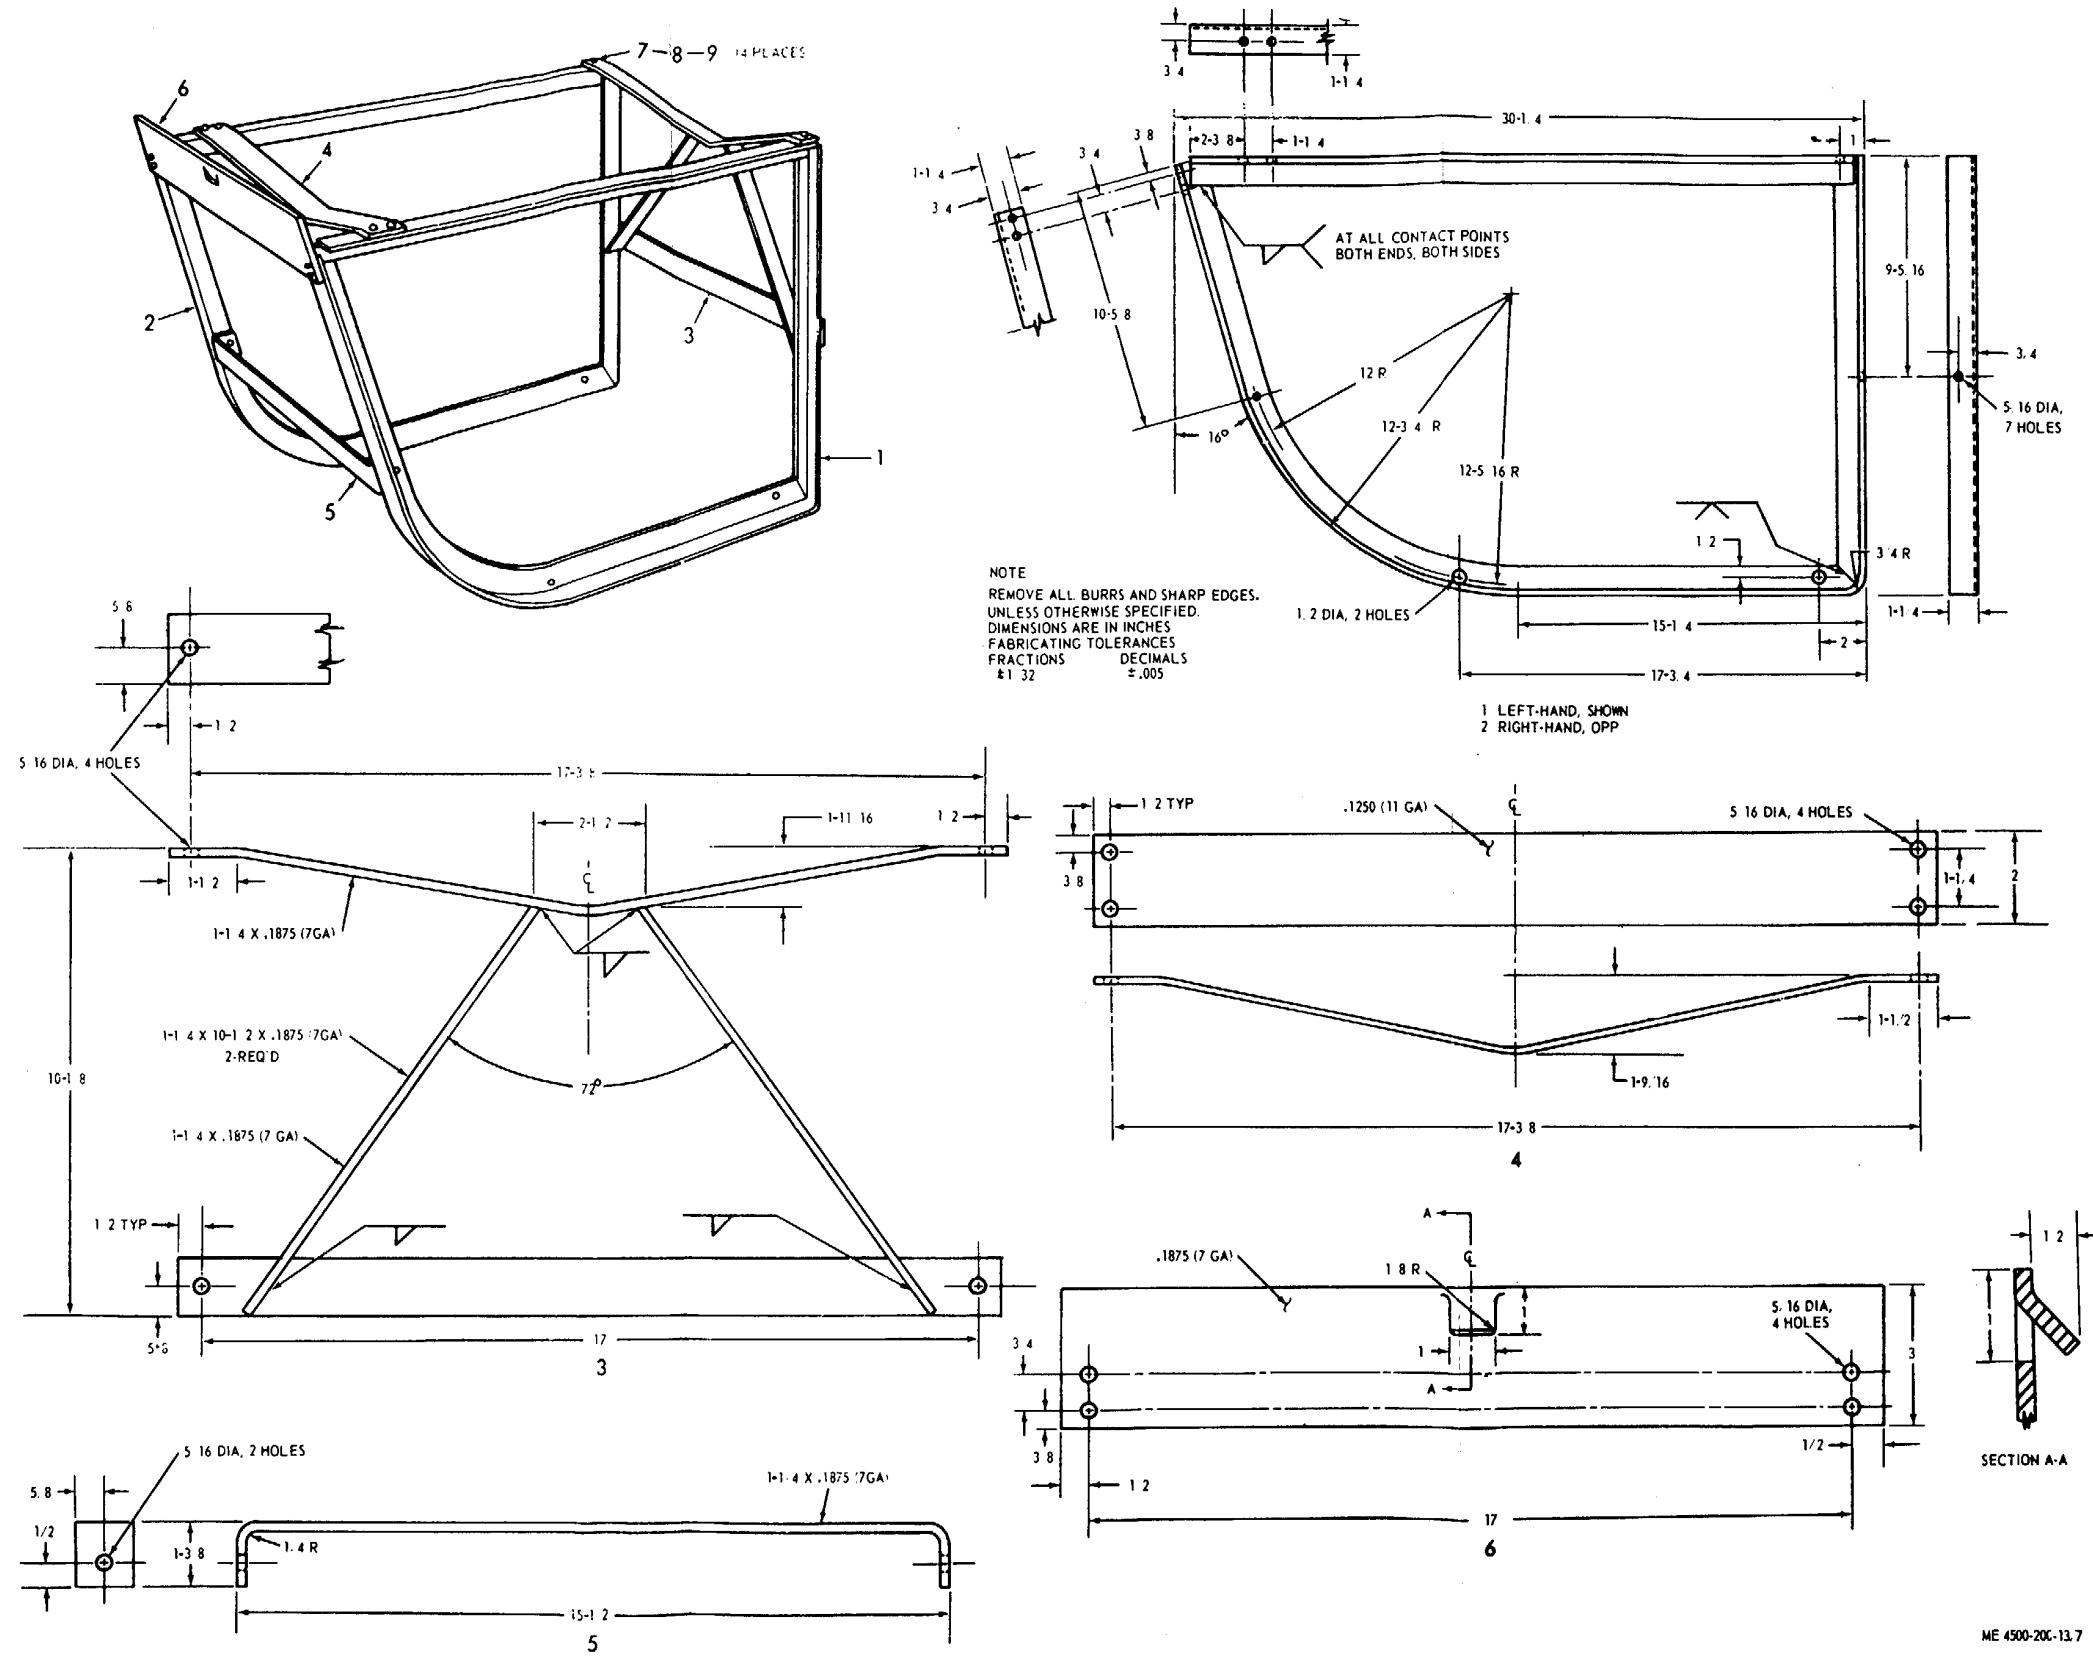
Fabrication and assembly of 55-gallon drum stand, style C.
